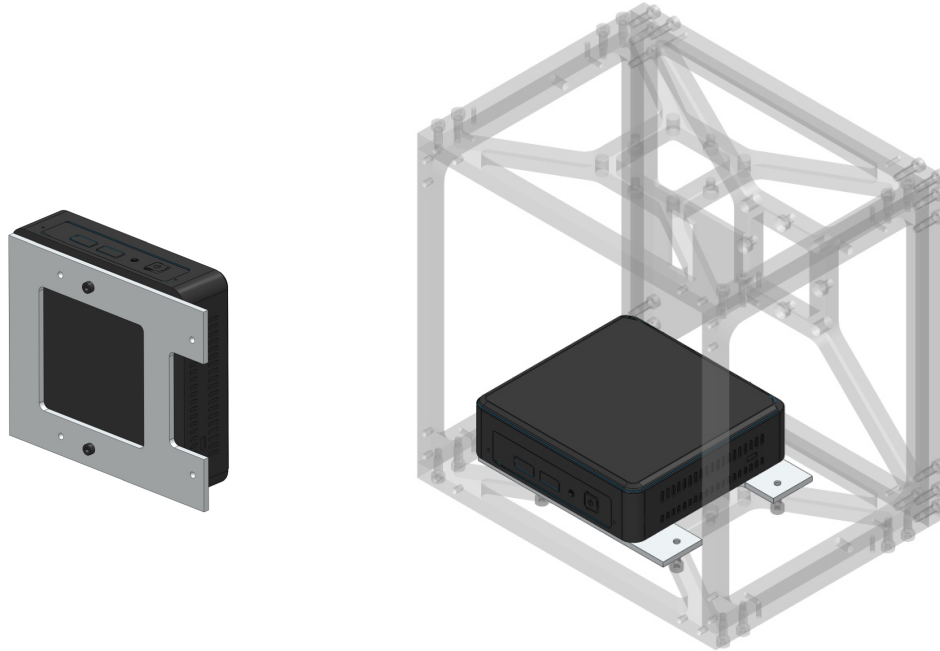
Isometric view of the computer mounting subassembly (left); the computer mounting subassembly mounted inside the chassis with the chassis displayed transparent (right).
